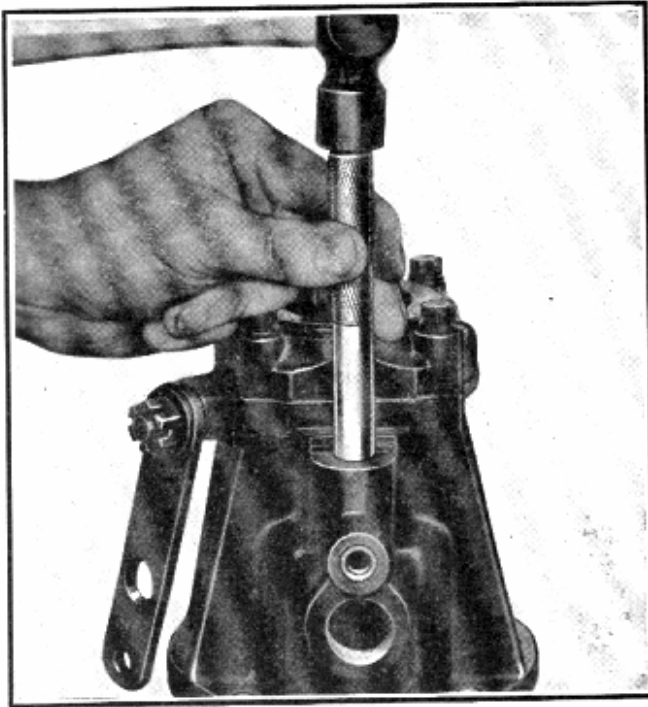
Installing Shift Shaft Oil Seal, Tool No. J-1717
